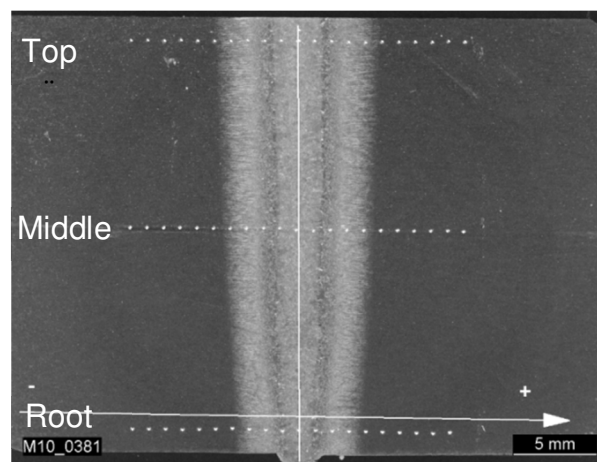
Hardness test positions across the weld joint.
